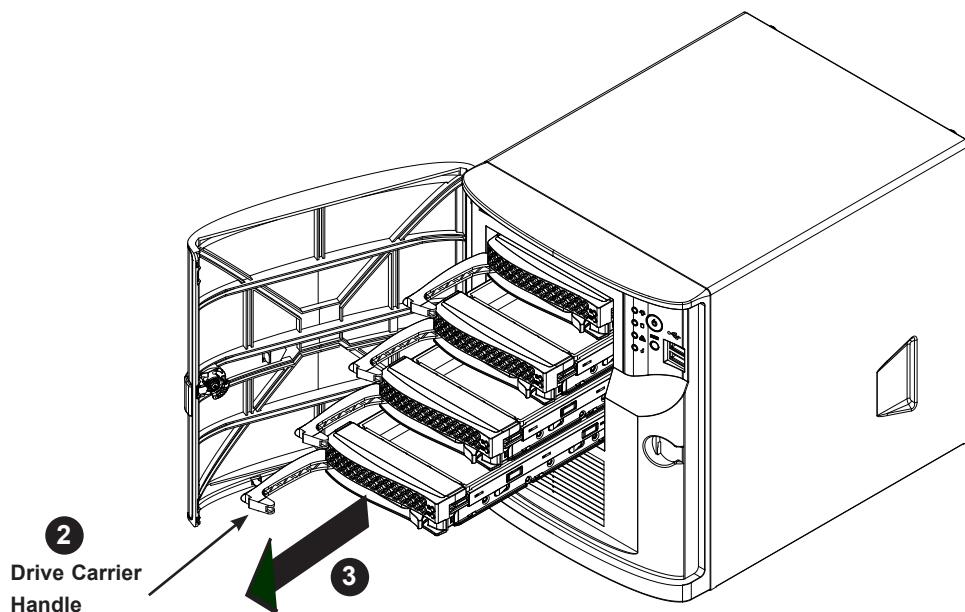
Removing the Hard Drive Carrier from the Drive Cage
